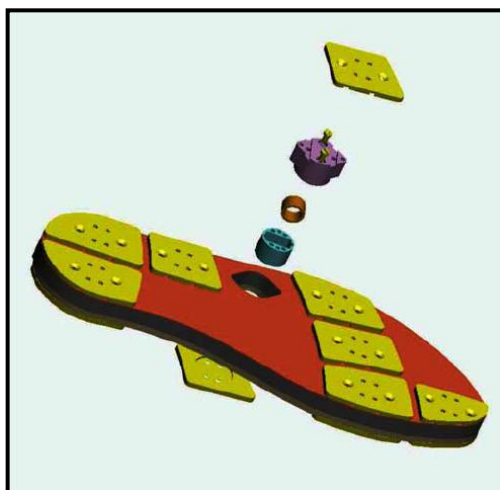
Sole with the eight areas and exploded view of transducer (ring, box, aluminium plates) (Faivre, Dahan, Parratte, and Monnier, 2003)
